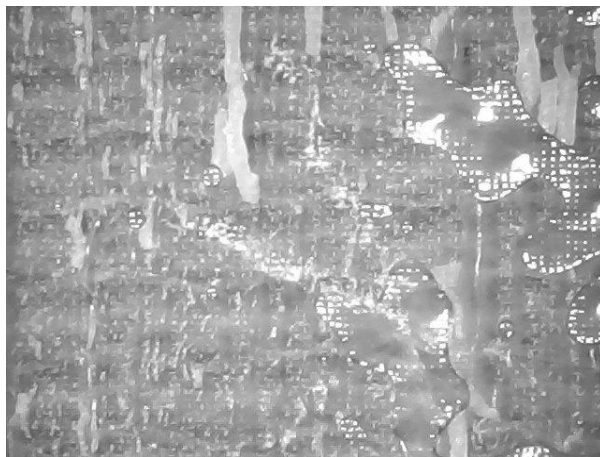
Cohesive fracture and adhesive bondline fracture at 10X
